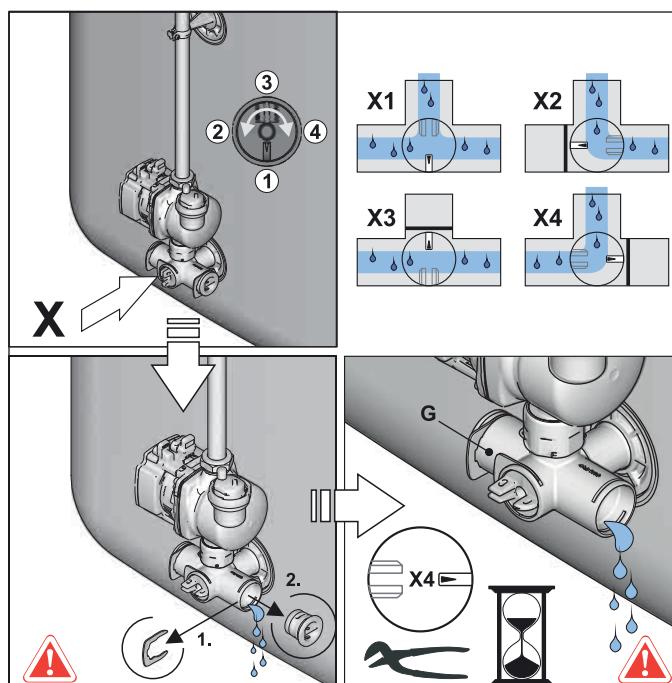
Shutting off the valve insert and removing the blanking plug from the connecting angle
